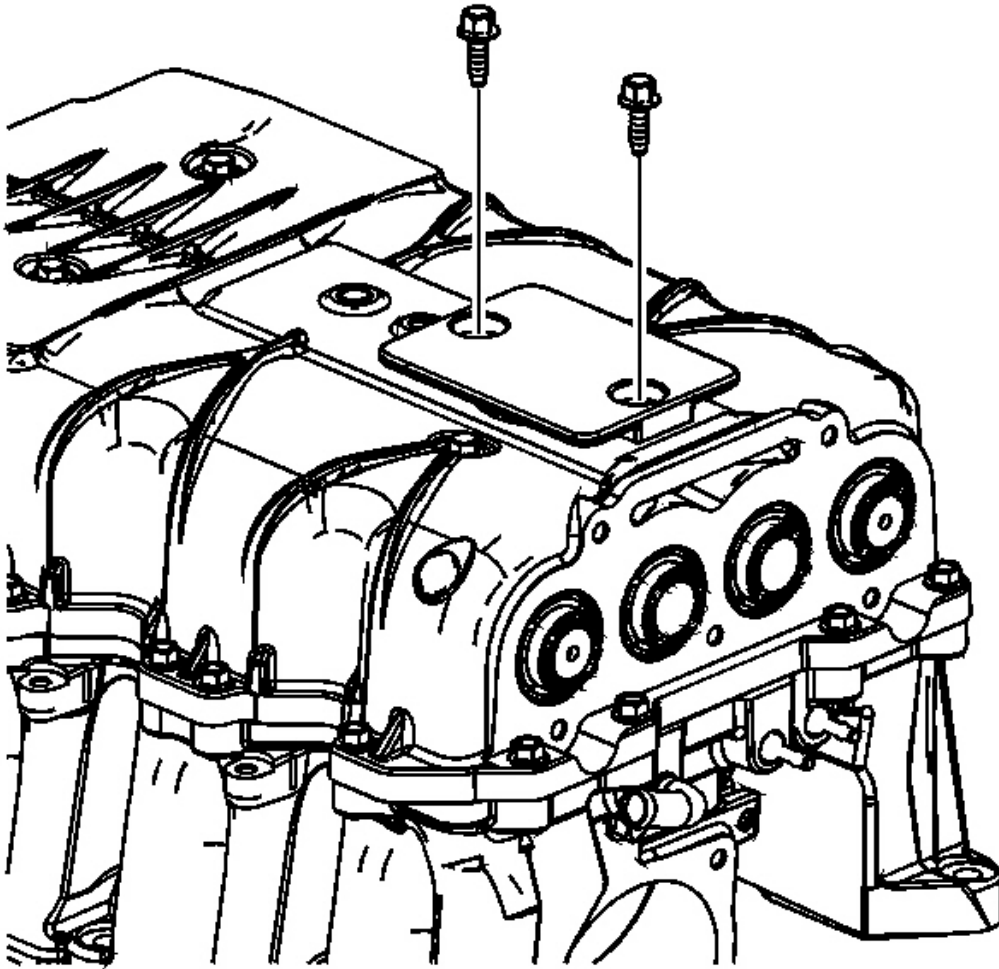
View Of Charge Air Cooler Cooling Fill Cap
